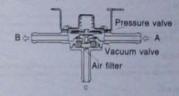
Testing the fuel tank check valve (Sec 39)
